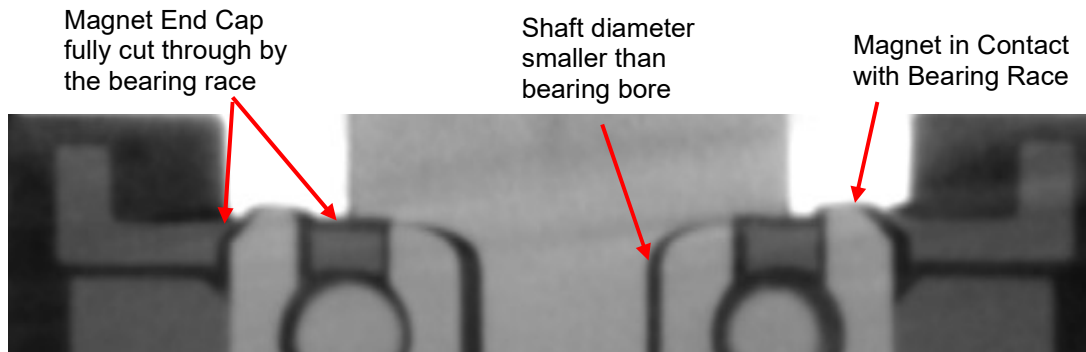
Close-up of the Motor Rear Bearing Showing the Wear of the Components of the Rotor
